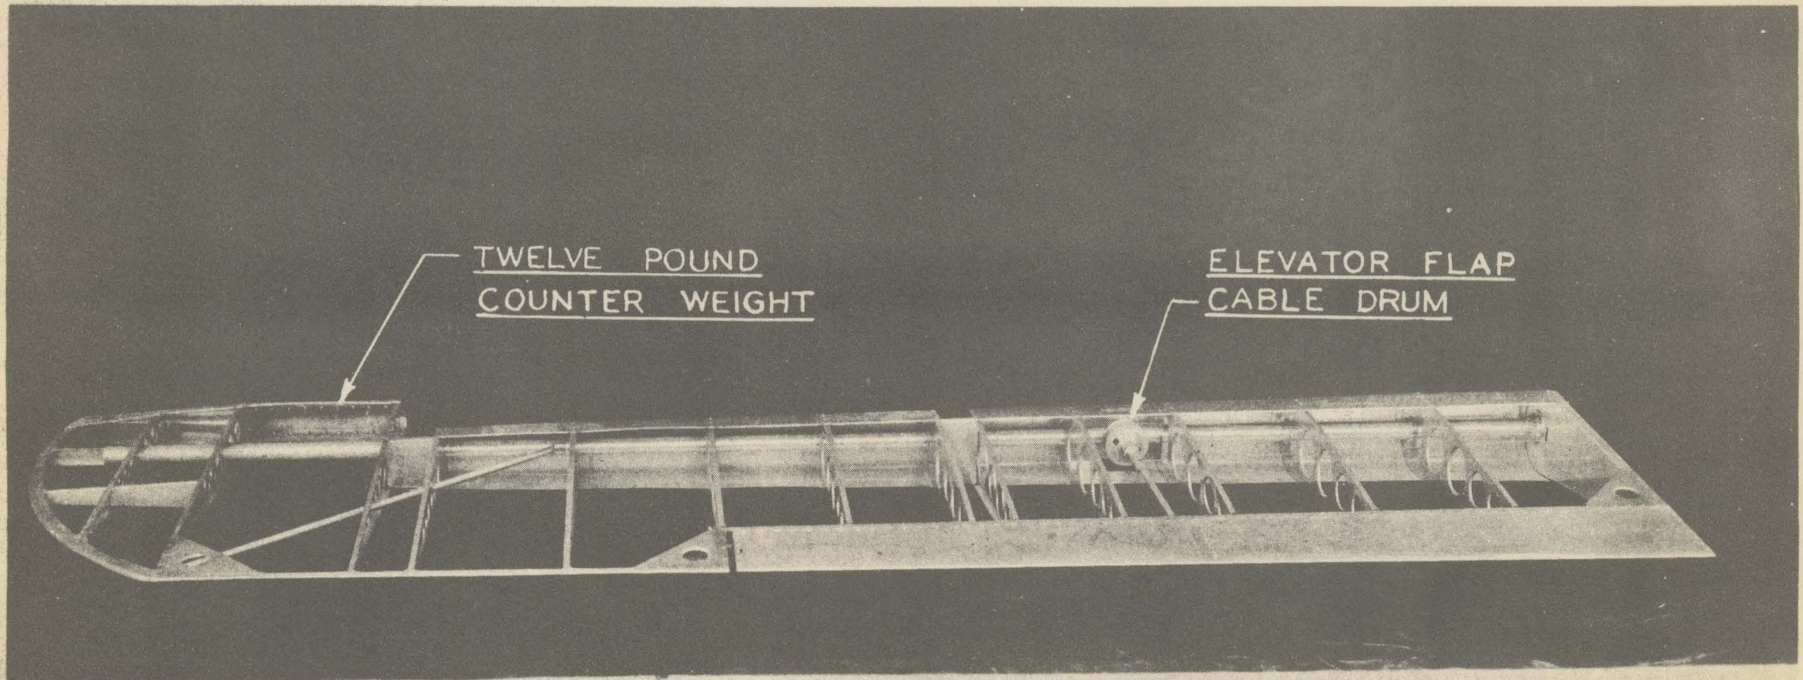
ELEVATOR FRAME WITH FLAP INSTALLED
